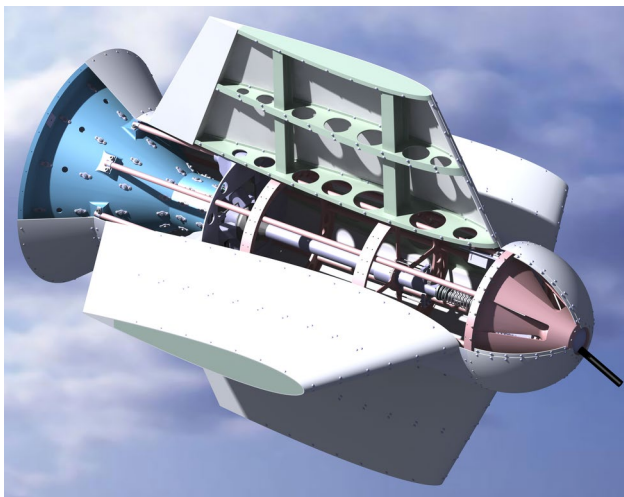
Cutaway view of the integrated CAD model of the proposed ACCD design
